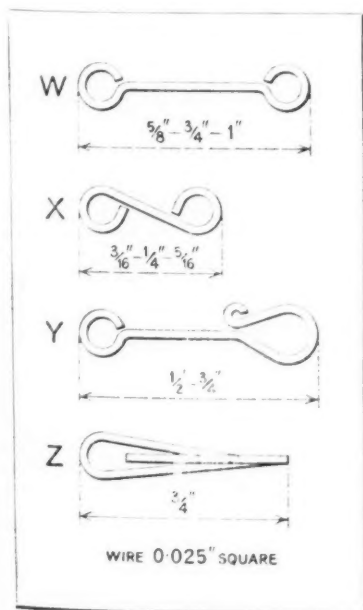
Rolled Gold Wire Links Produced on Automatic Machine
